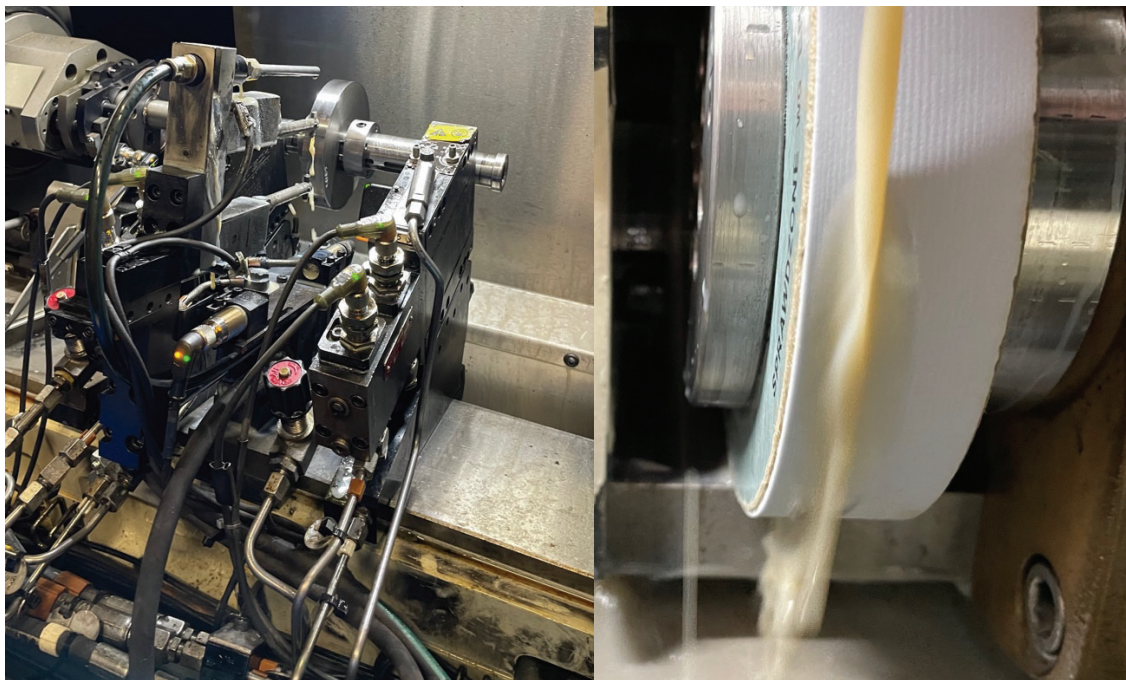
LEFT: Fixture for rotary samples in the grinding machine, RIGHT: Grinding wheel after texturing attempt.
